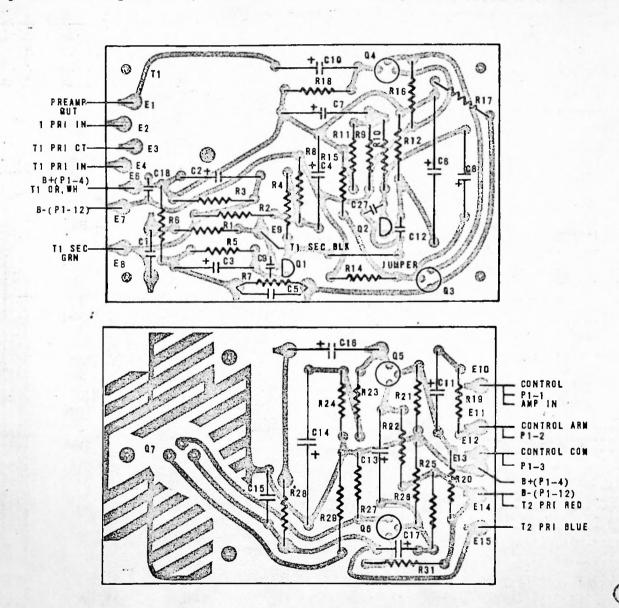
Printed Board Component Location, Viewed from Wiring Side.
